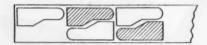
Drawing showing arrangement of punches to produce two pieces at each stroke of the press, the die being laid out to minimize the scrap produced. Punches are shown in section.
